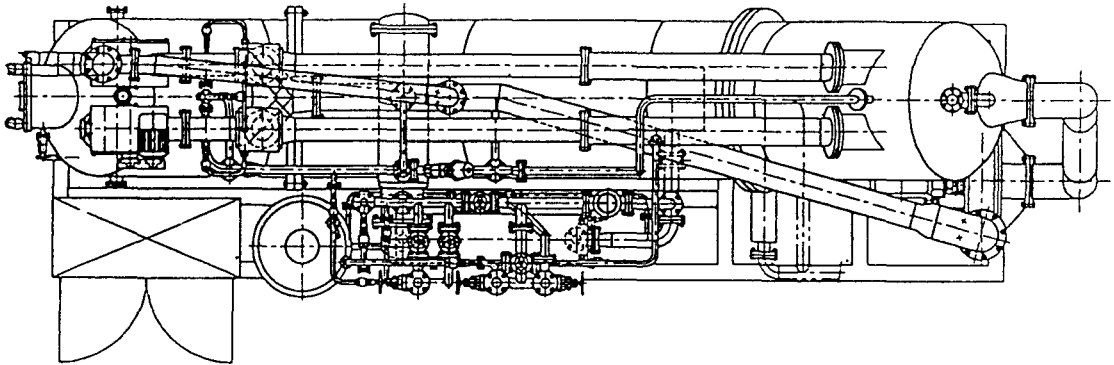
Plane figure of the 1 tube 2 chamber bent silkworm type dyeing machine.
